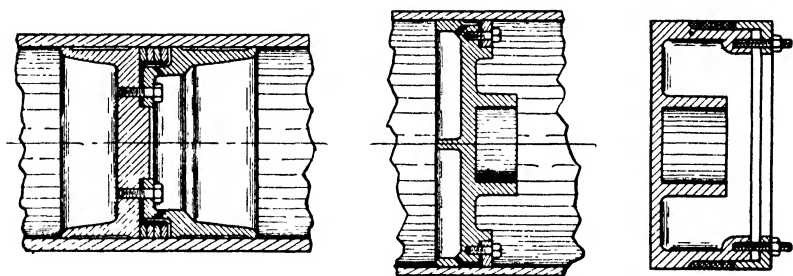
Section of Piston, Showing Hale Hemp Packing in Place
